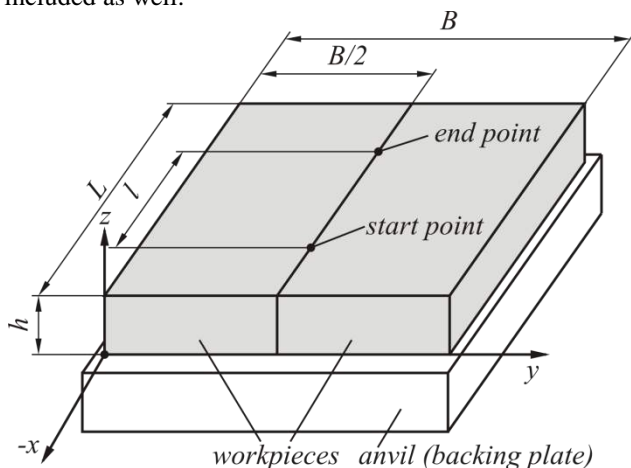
Scheme of the positioned workpieces in position for welding
